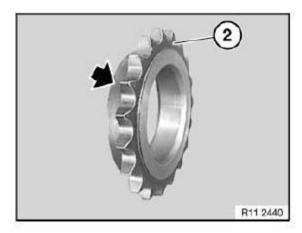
Identifying Sprocket Wheel Courtesy of BMW OF NORTH AMERICA, INC.
